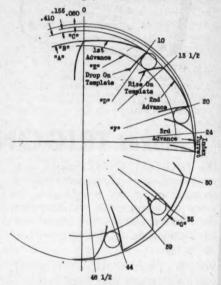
Drawing to be Used in Conjunction with Chart No. 1 to Determine Hundredths Required for Drill Pull-Outs
